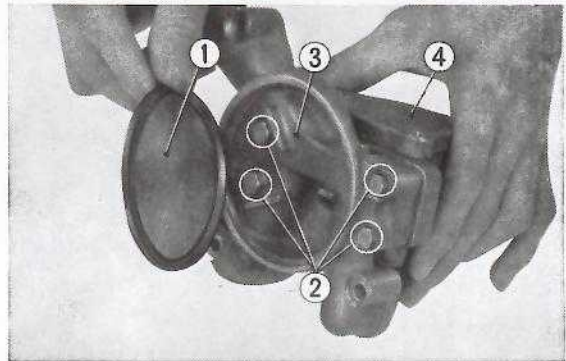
① Metal oil screen ③ Oil pump base
